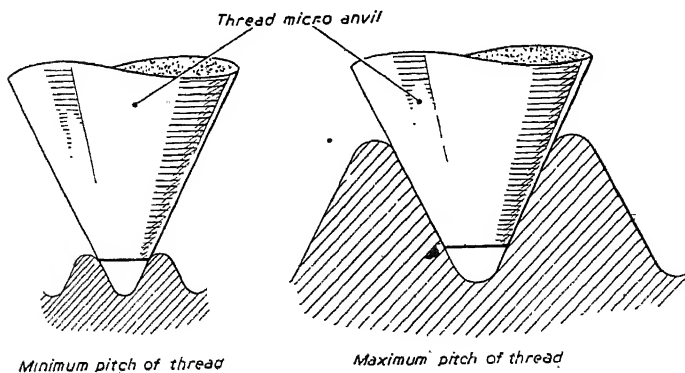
Showing limitation of thread pitches which thread micrometer anvil will accommodate.
